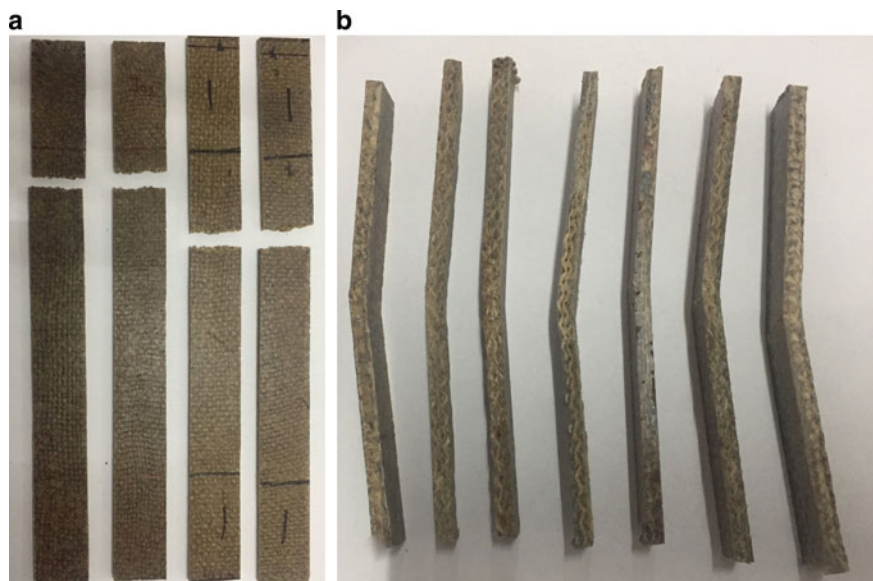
a Fractured tensile specimens. b Fractured flexural specimens
